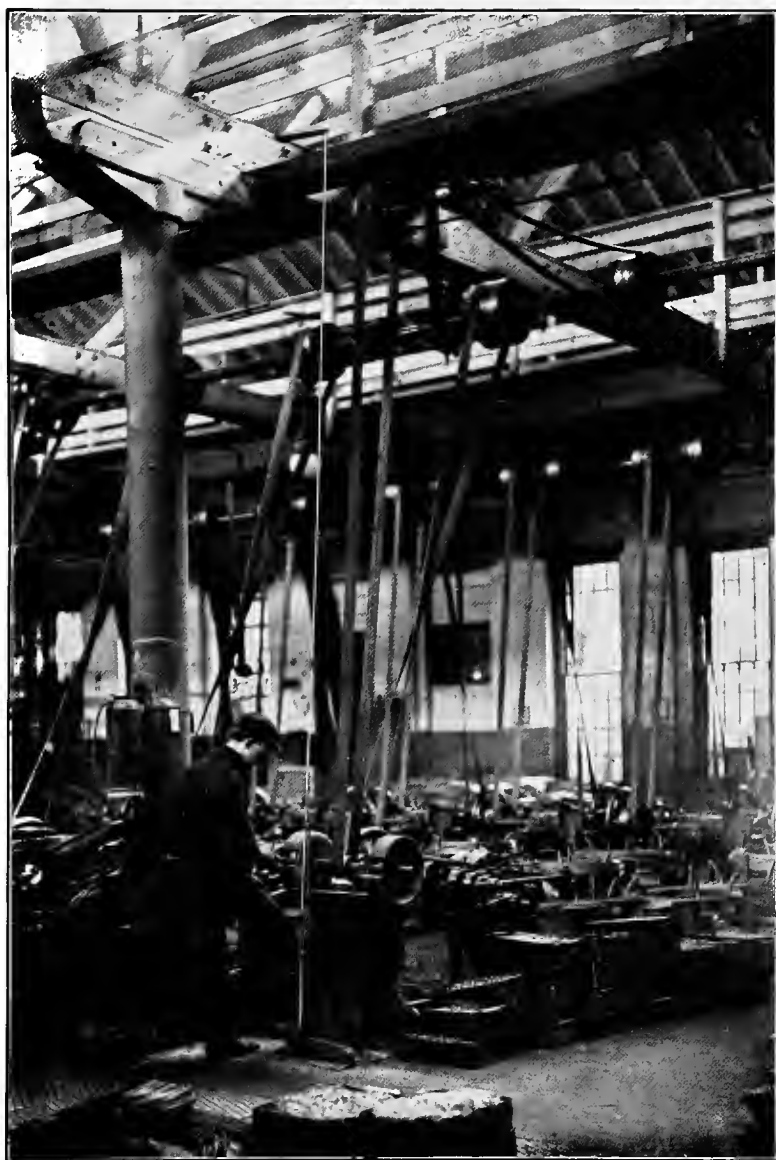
PLATE II.—VIEW IN NAIL MILL SHOWING SAFETY HOODS OVER EMERY GRINDERS, WHICH ARE FLANGED OUT OF A SOLID PIECE OF STEEL PLATE
